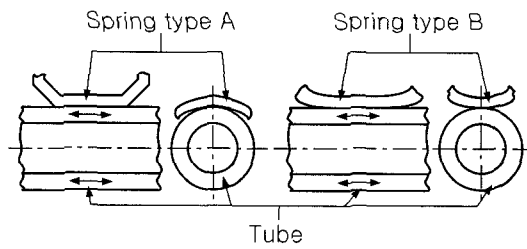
Schematic view of the contact configuration between type A and B spring and tube specimens.
